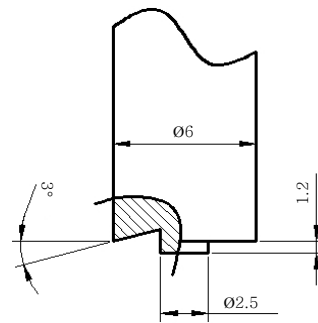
Schematic view of probe tool used for friction stir spot welding
